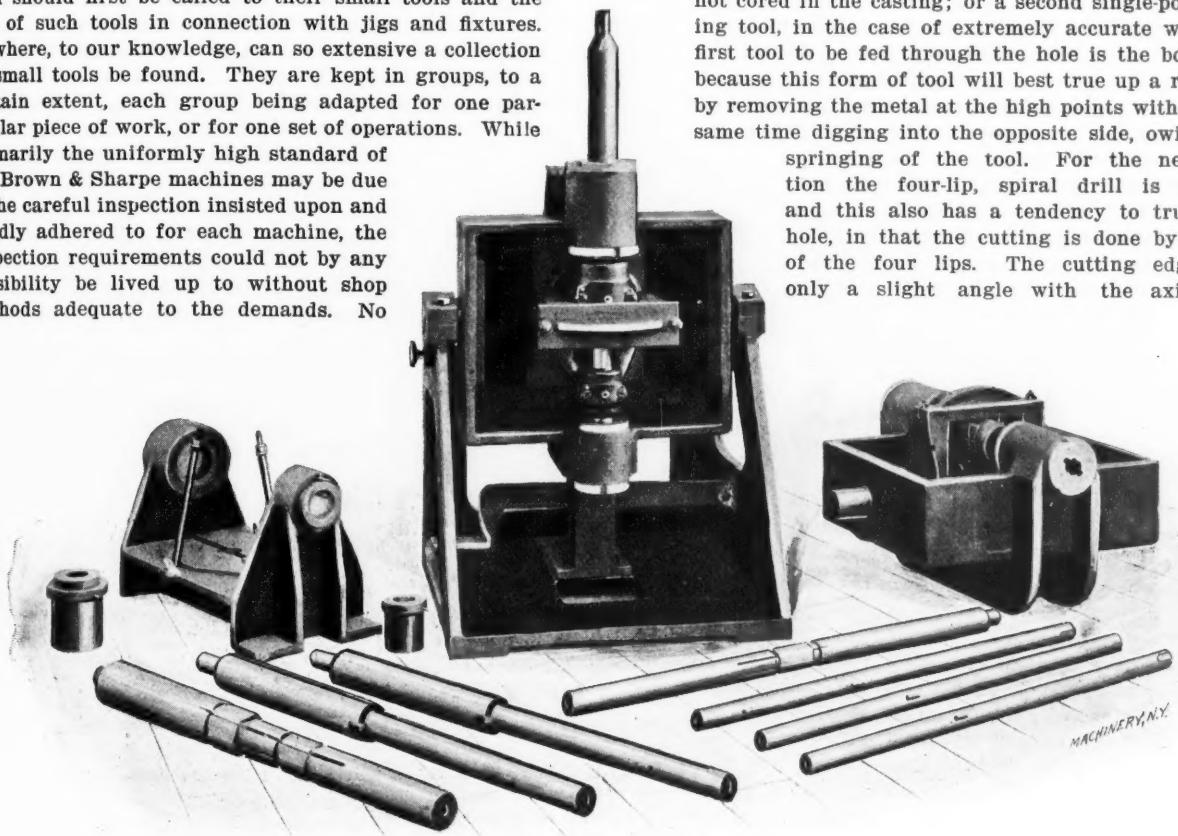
Jig and Tools for Boring Grinding Machine Head and Foot Stocks.
